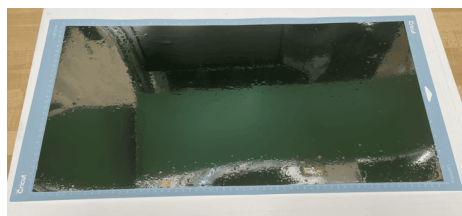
After using the acrylic block and cutting the edge you should be left with this.
